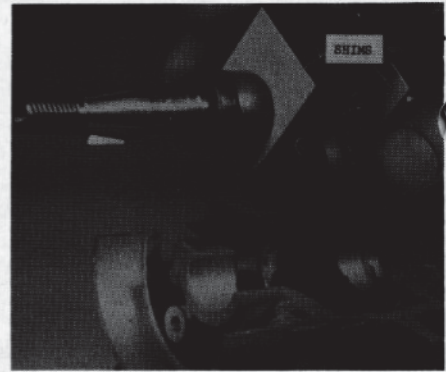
View showing placement of shims (Fig. HL304) between thrust washers (9—Fig. HL303) and bearings (10) for correct crankshaft assembly. Refer to text.
